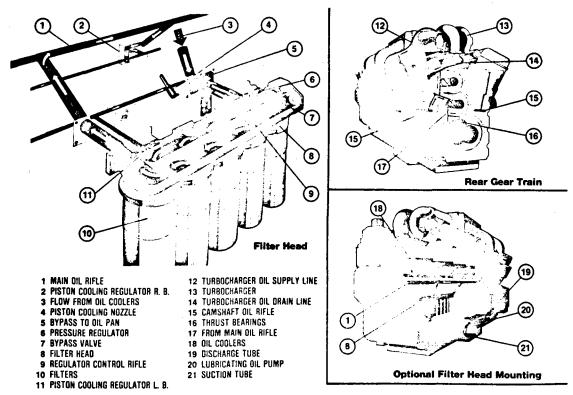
, (LWC-36). Optional lubricating oil flow schematic -- KTA-3067 Engine
